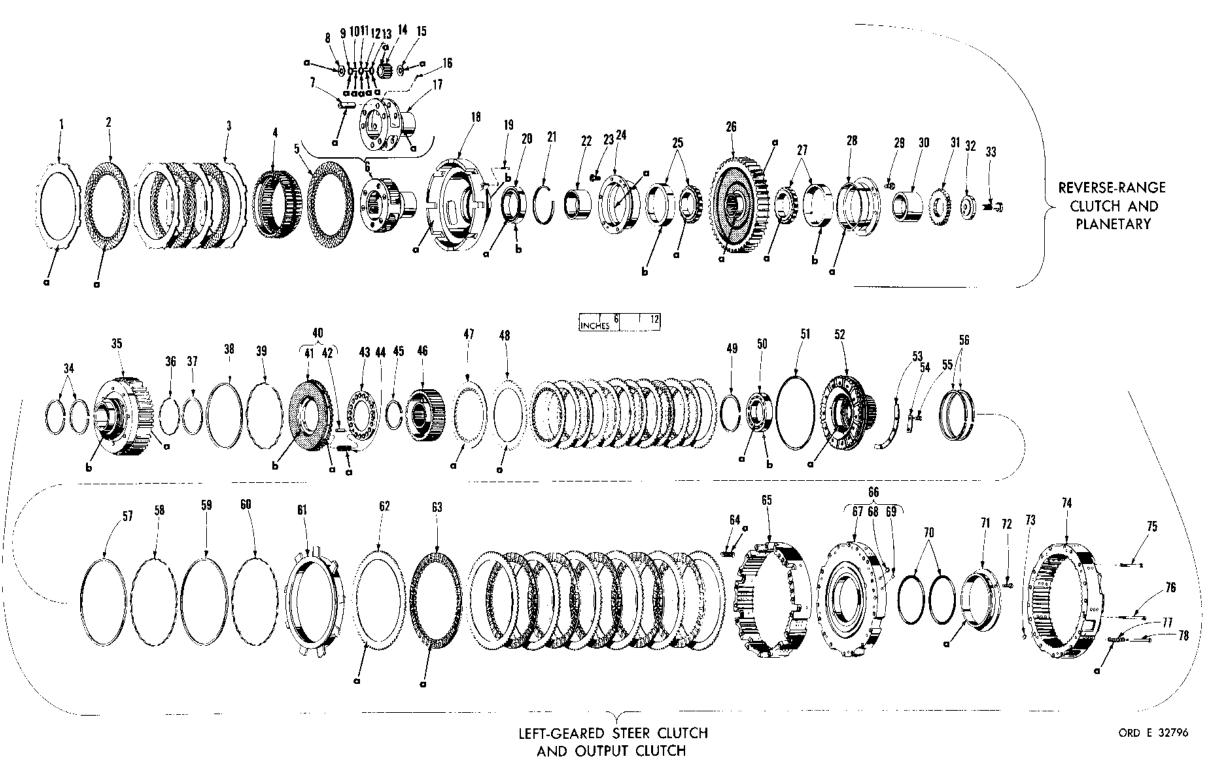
Fold-out 6 — Reverse-range clutch and planetary; left steer and output clutches—exploded view
